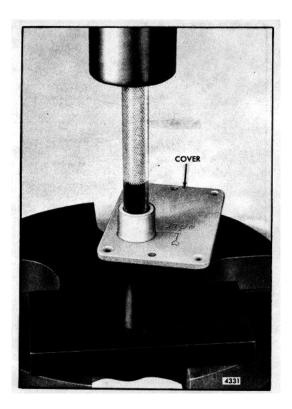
Removing Bearings from Cover using Tool J 21967-01
